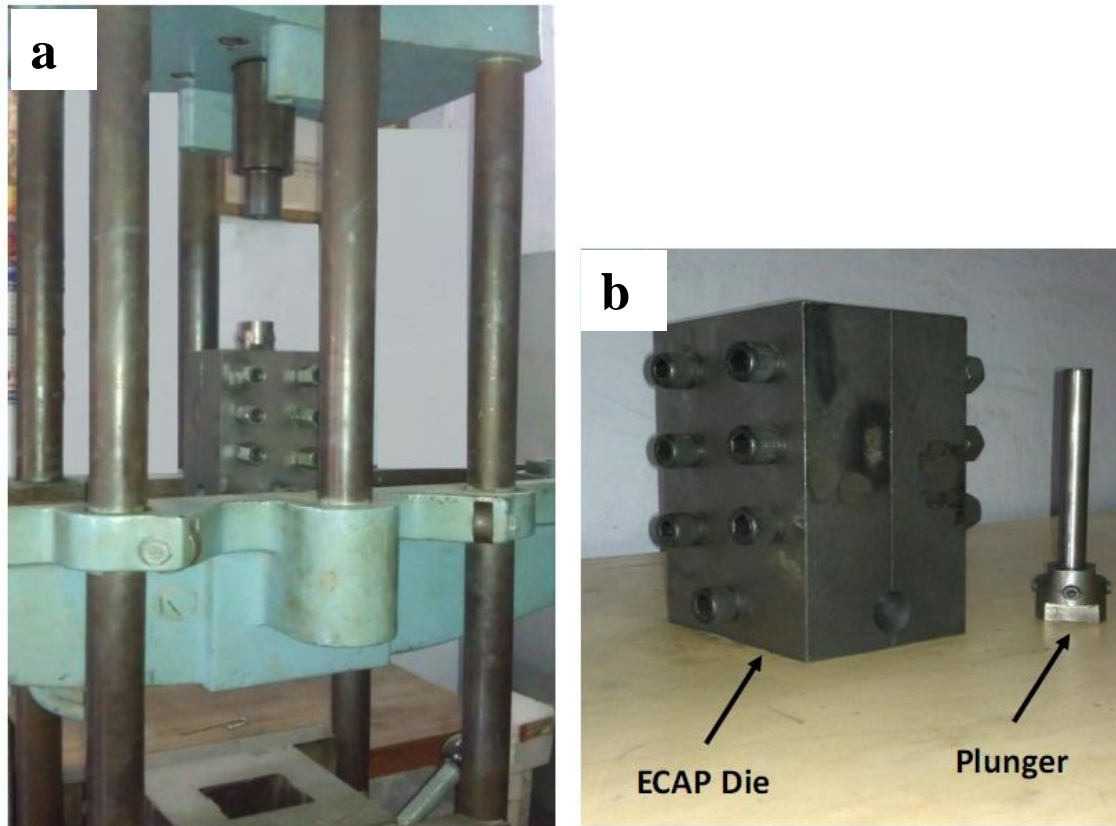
(a) Universal testing machine used in ECAP (b) ECAP die and plunger.
